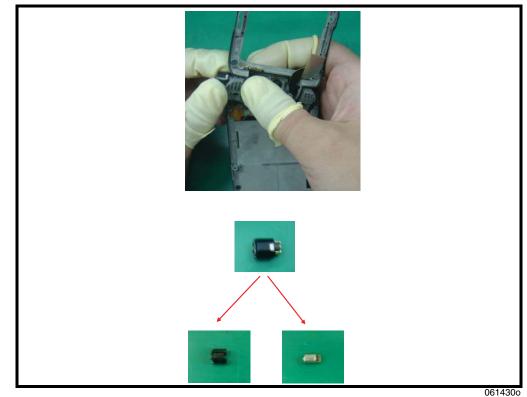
Removing the Flip Hinge Assembly Hinge Spring
